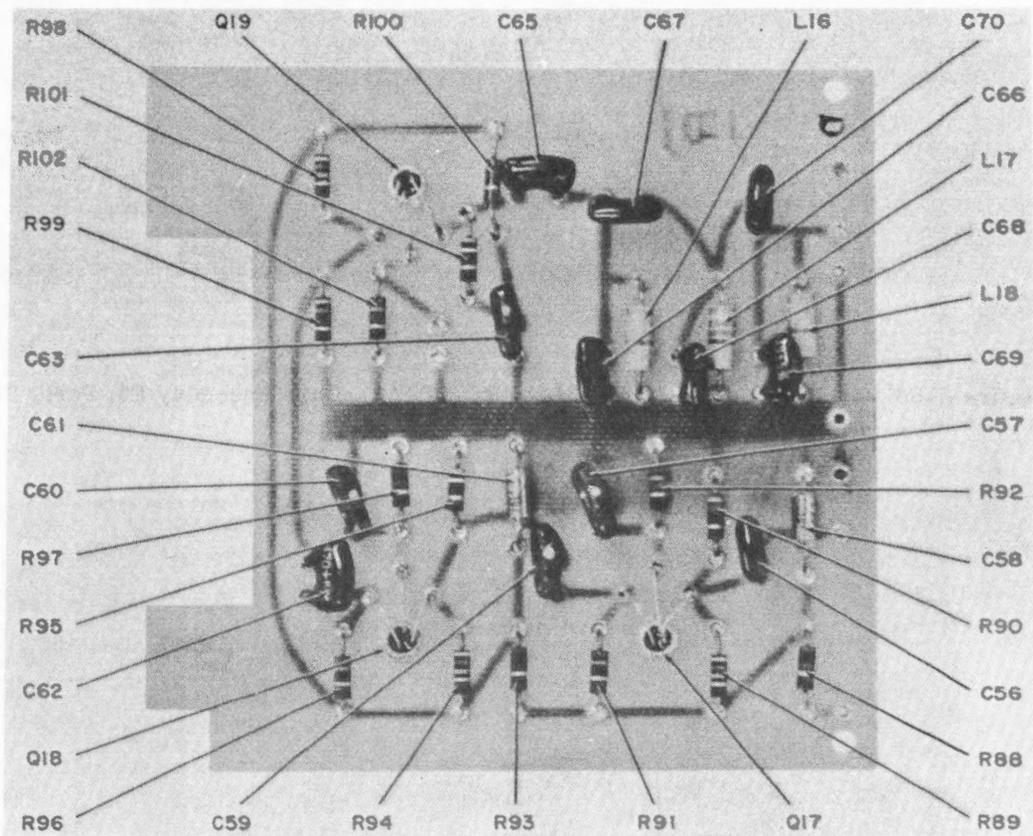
Oscillator Control C-4311/PRC-47 (A7), Card Assembly E4, Parts Location
